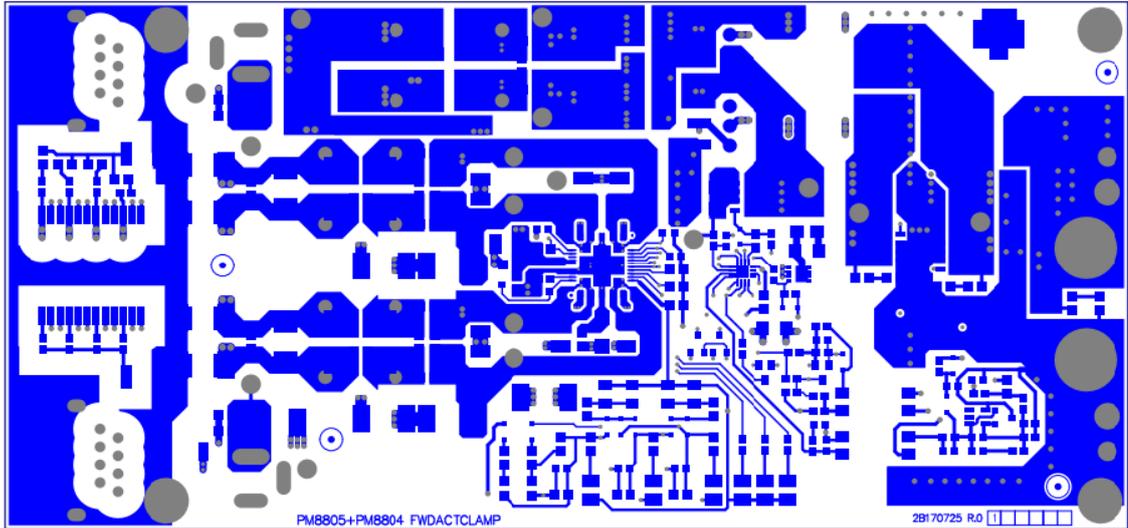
STEVAL-POE003V1 reference design: PCB layer 2
